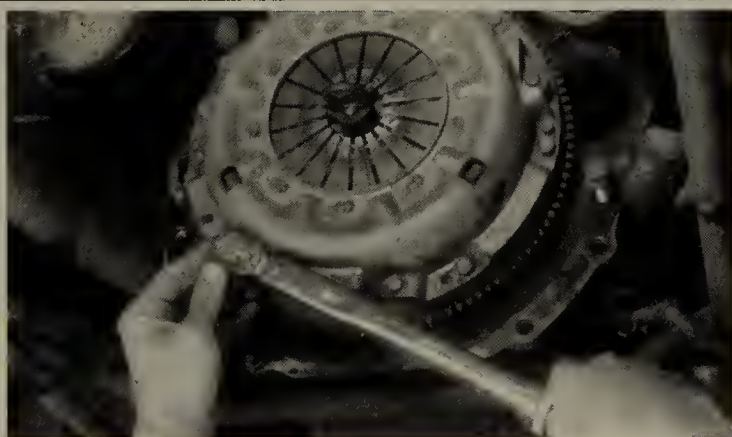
Install a clutch alignment arbor, to align the clutch assembly during installation
